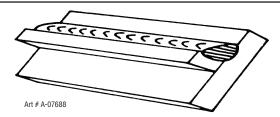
Flat Position, Gravity Fillet Weld
